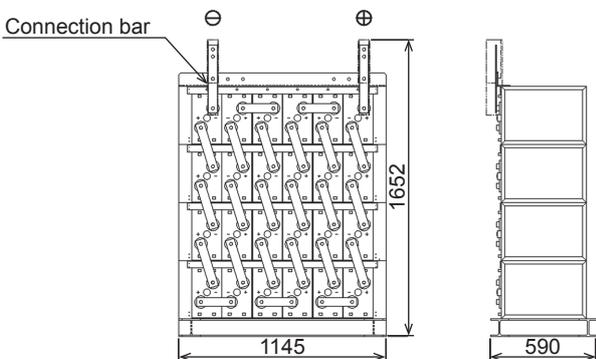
External dimensions of newly developed "SLR-1000" assembled battery.
